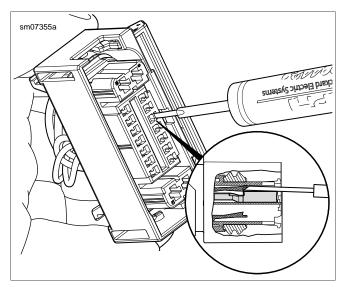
Removing Small Socket Terminal: Tyco MCP
